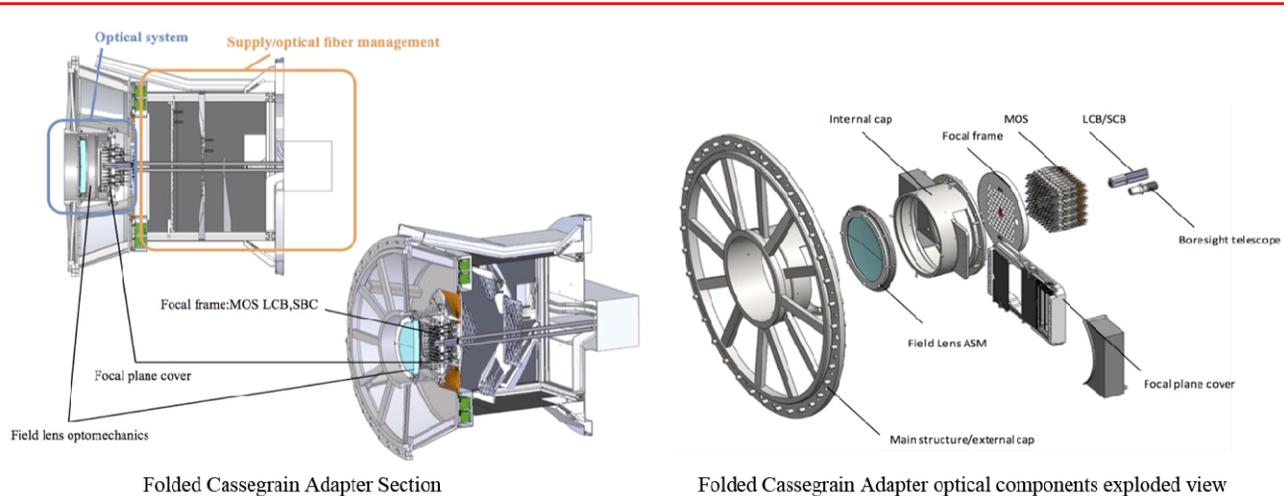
Section of the Folded Cassegrain subsystems assembly and an exploded view of the optical components.
